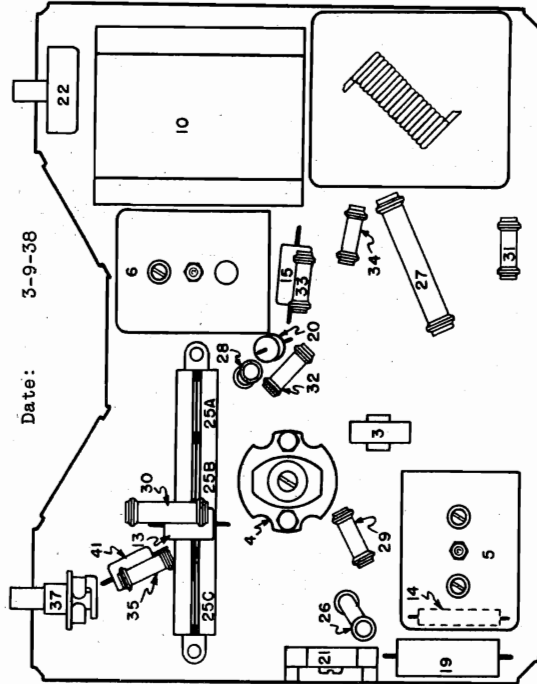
PARTS LAYOUT--BOTTOM VIEW
